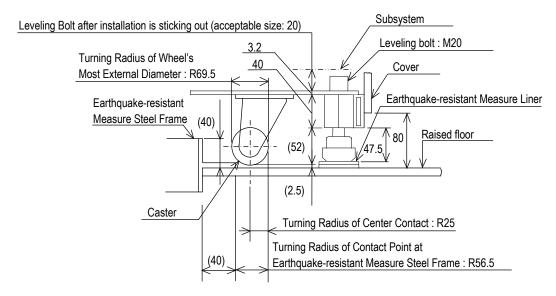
Cross-sectional View of Floor of A-6516-RK40 Rack Frame
